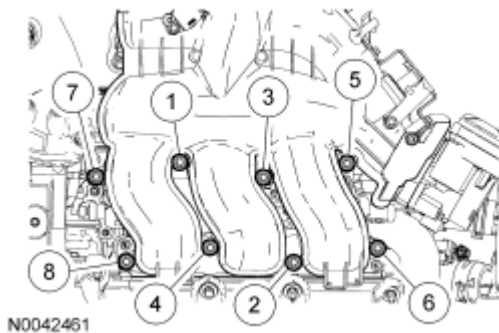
Identifying Tightening Sequence Of Upper Intake Manifold Bolts
